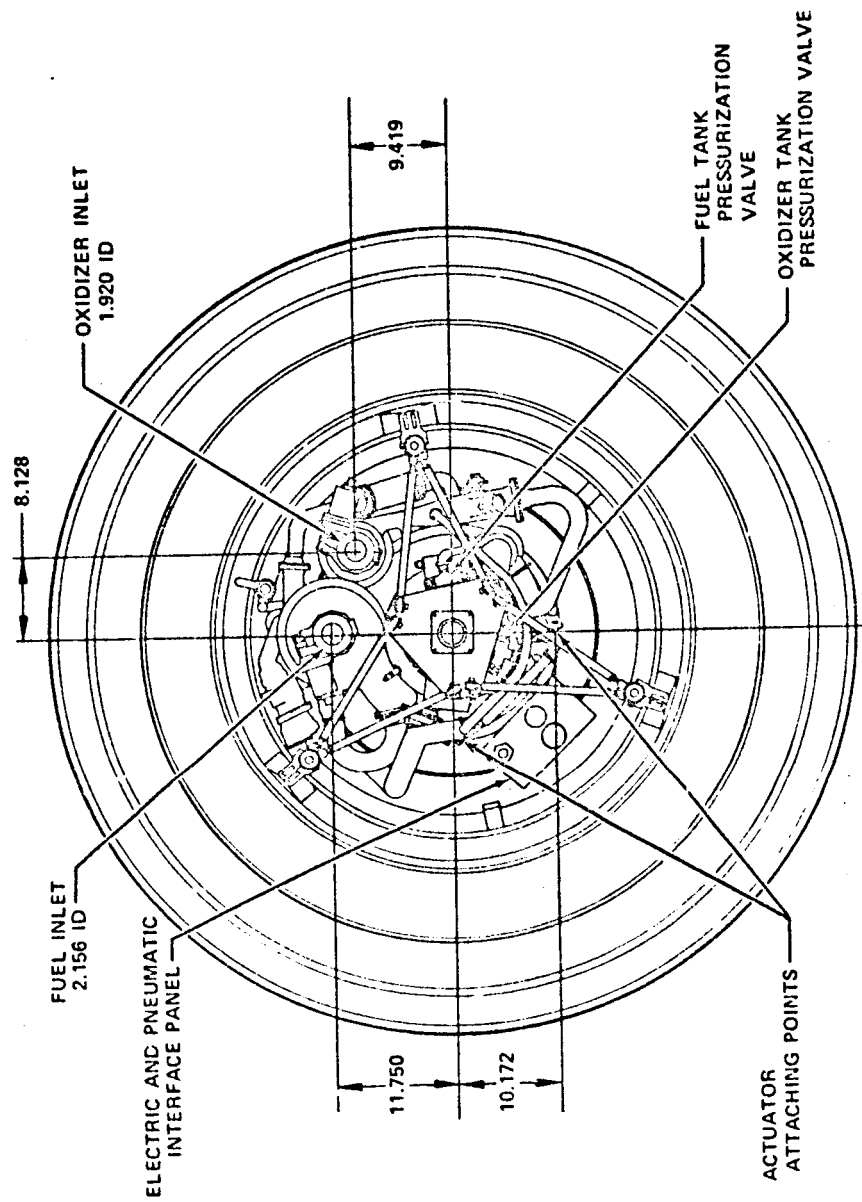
Derivative IIB Engine Installation Drawing (Sheet 1)
